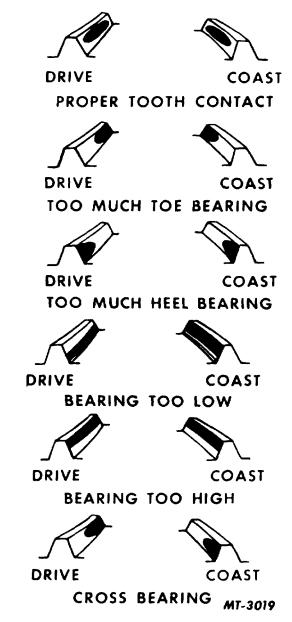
Location, Size and Shape of Correct Tooth Contacts
